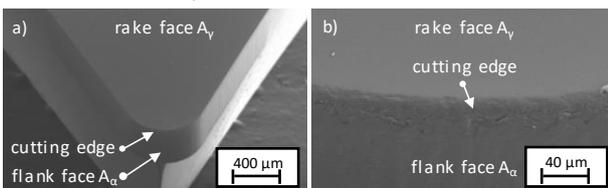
NPD turning tool, a) overall view and b) cutting edge detail view. To identify fundamental cutting mechanisms and ductile cutting regime of hard-brittle cemented carbide scratch tests were carried on the machine tool Nanotech 350 FG of the company MOORE NANOTECHNOLOGY SYSTEMS, LLC, Swanzey, USA. As workpiece material cemented carbide with a carbide content of $c_c = 88\%$, a cobalt content of $c_{co} = 12\%$ and a grain size of $d_g = 0.5 \mu\text{m}$ was used. Scratch tests were done with a cutting speed of $v_c = 0.1 \text{ mm/min}$ on a circular path with a radius of $r_c = 12 \text{ mm}$ on a length of $l_c = 25 \text{ mm}$ and a maximum depth of cut of $a_{p,\text{max}} = 25 \mu\text{m}$. Fundamental cutting mechanisms could be identified by scratch tests with a minimum chip thickness h_{min} at a depth of cut of $a_p = 1.8 \mu\text{m}$, a ductile cutting regime with great chip formation in the range of $a_p \leq 20 \mu\text{m}$ and a transition to hard-brittle material behavior for $a_p \geq 25 \mu\text{m}$ and a force measurement in a range of $14 \text{ N} \leq F_p \leq 16 \text{ N}$ for cutting tools with a corner radius of $r_e = 400 \mu\text{m}$. Figure 3 shows SEM images of workpiece surfaces in ductile cutting regime with a depth of cut of $a_p = 20 \mu\text{m}$ and the transition zone to hard-brittle material behavior at $a_p = 25 \mu\text{m}$. For a ratio of the cutting edge radius to the depth of cut $r_\beta/a_p \leq 0.524$ surface cracks occur and dominate
